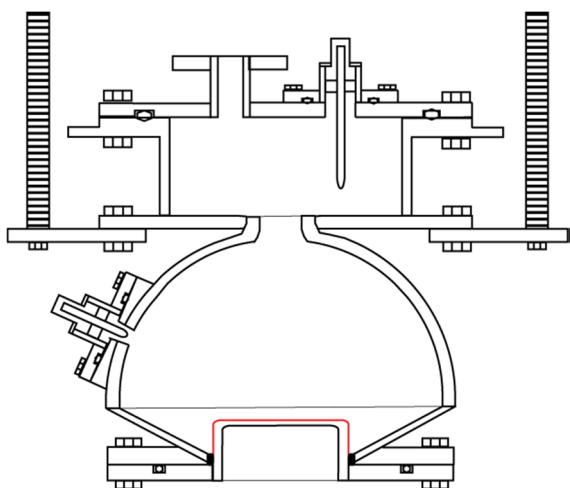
Cross-sectional drawing of mushroom-shaped Nb cavity.
